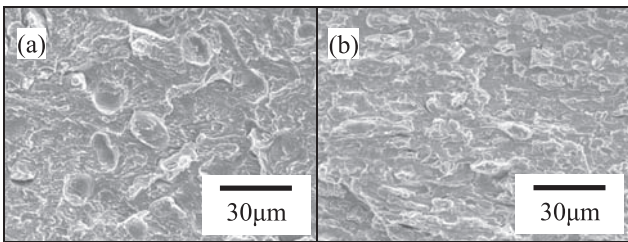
Fracture surfaces of test ingots after transverse test.
